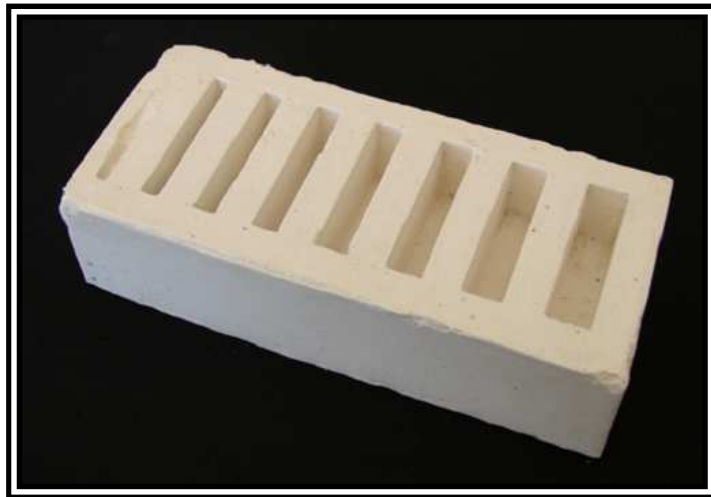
Test geometry 4 – re-test – plaster of Paris mould
